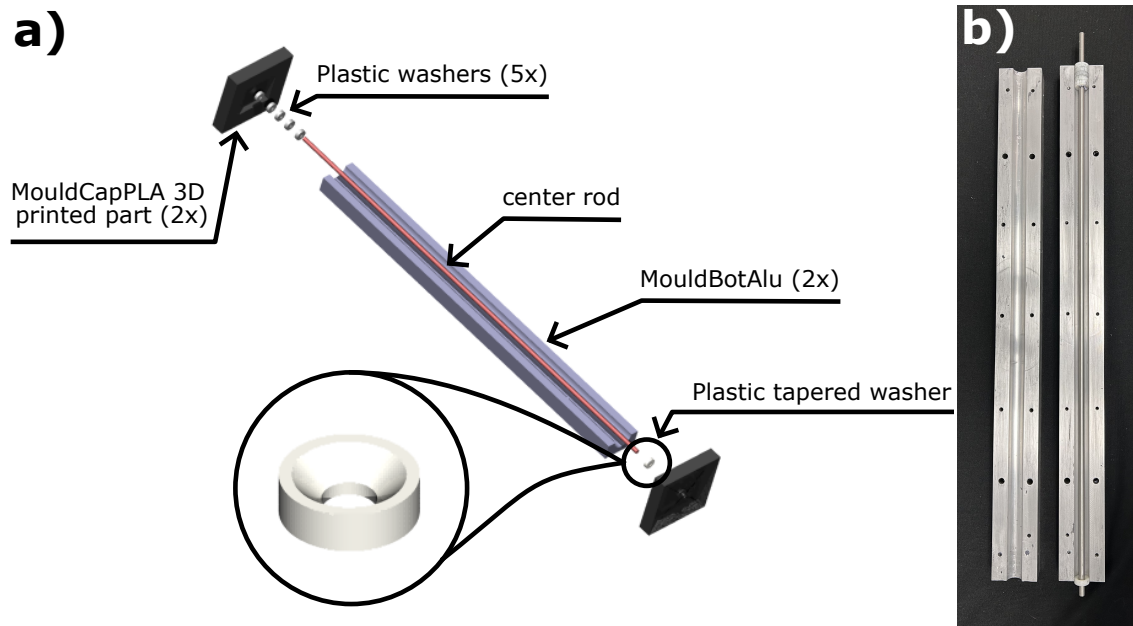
Modification to the mould assembly of Demenois et al. (2023). a) 3D visualisation of the mould assembly. b) Experimental visualisation of the mould.
